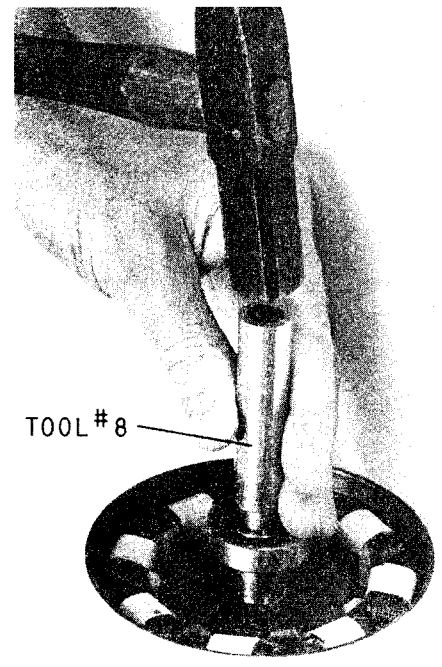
INSTALLING MOTOR BEARING (DRIVE END)
